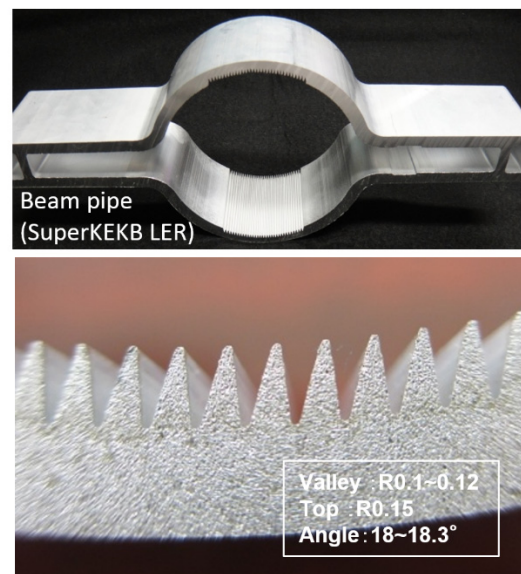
Grooved structure on the top and bottom of the beam channel of the new beam pipe.
